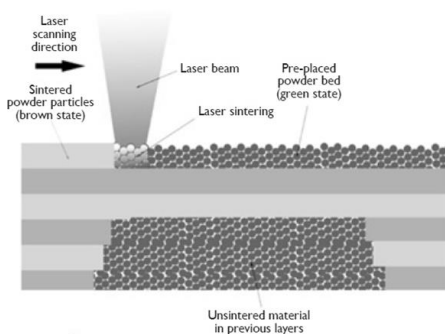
Cross sectional view of the Laser Beam fusion process in powder bed
